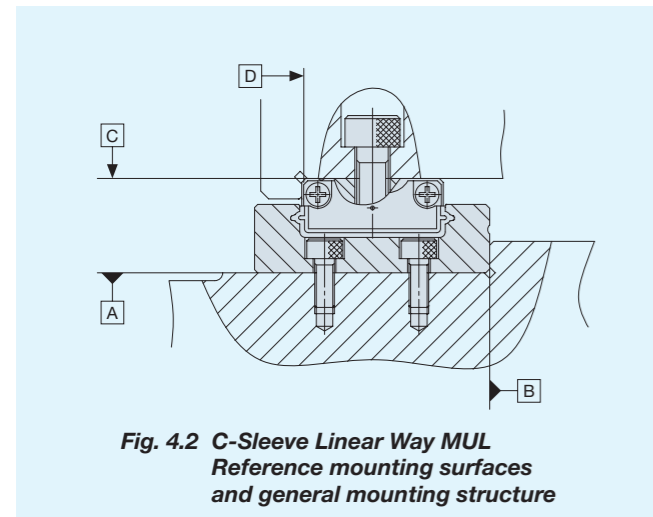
C-Sleeve Linear Way MUL Reference mounting surfaces and general mounting structure
